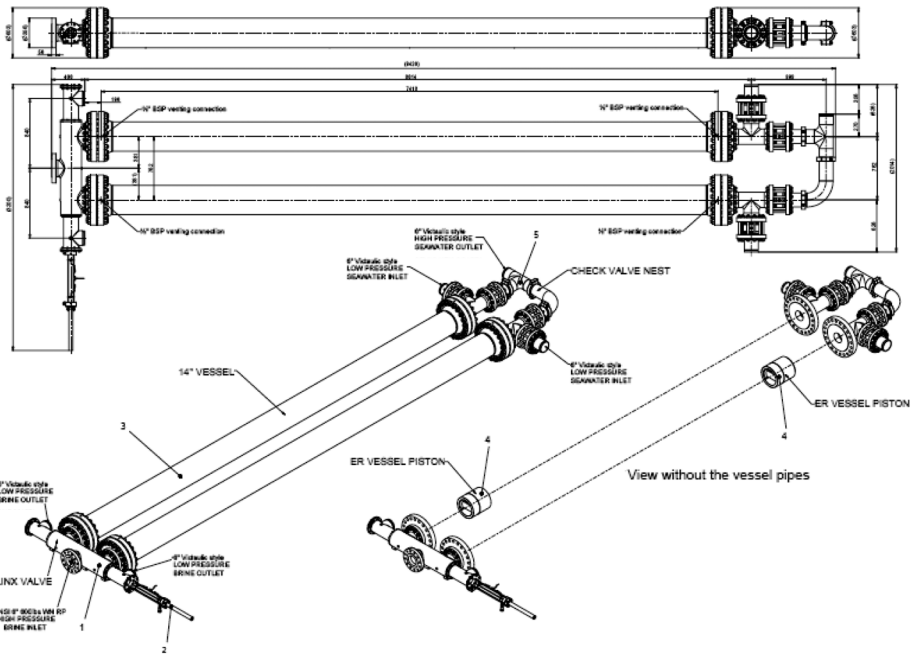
Schematic drawing of DWEER pumping-power recovery device (courtesy of Calder Corporation).
